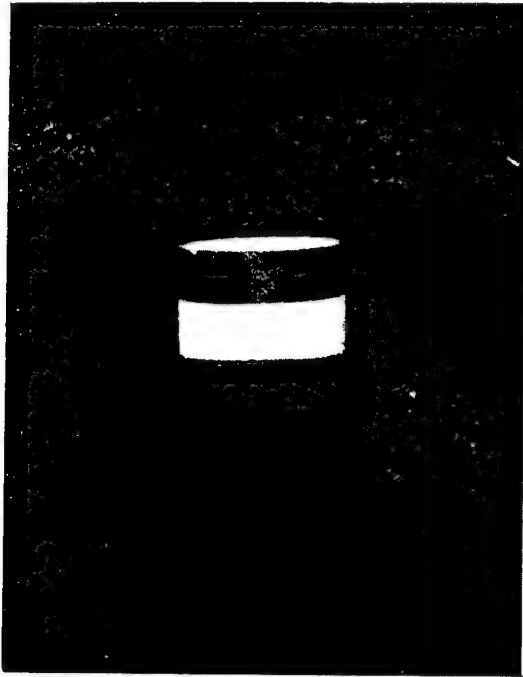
Ceramic Insulator with Metallized Coating around Top and Bottom of Cylinder. 2X.
